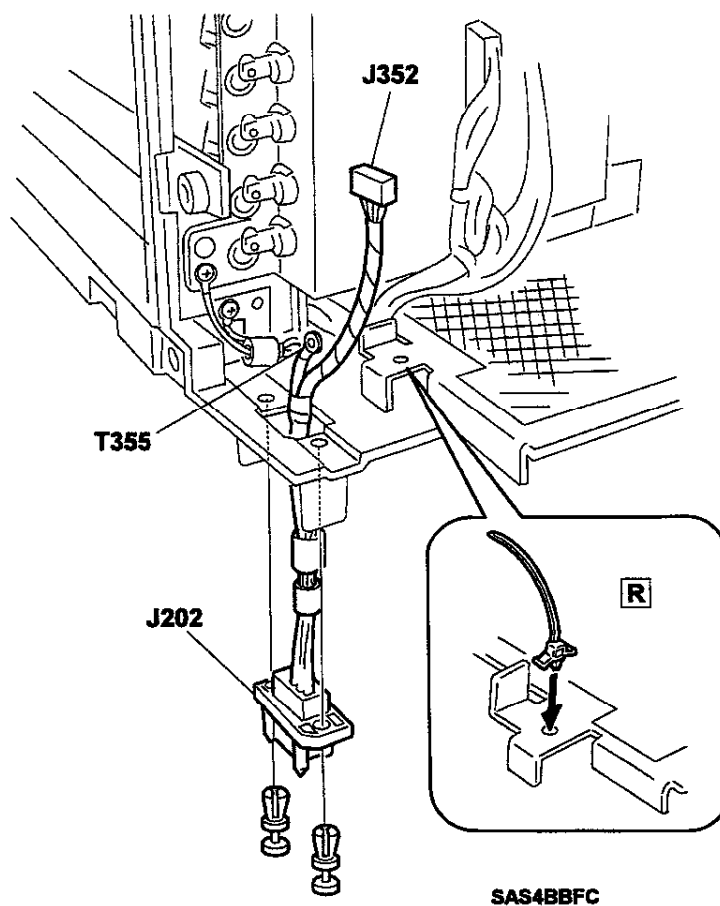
Removing the Print Engine Controller Harness
